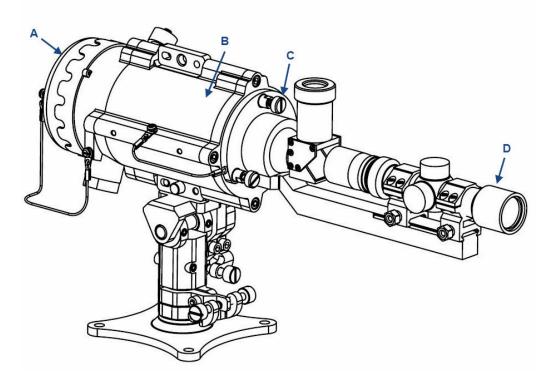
Detector and Tilt Mount Assembly Using Lower Mounting Access
